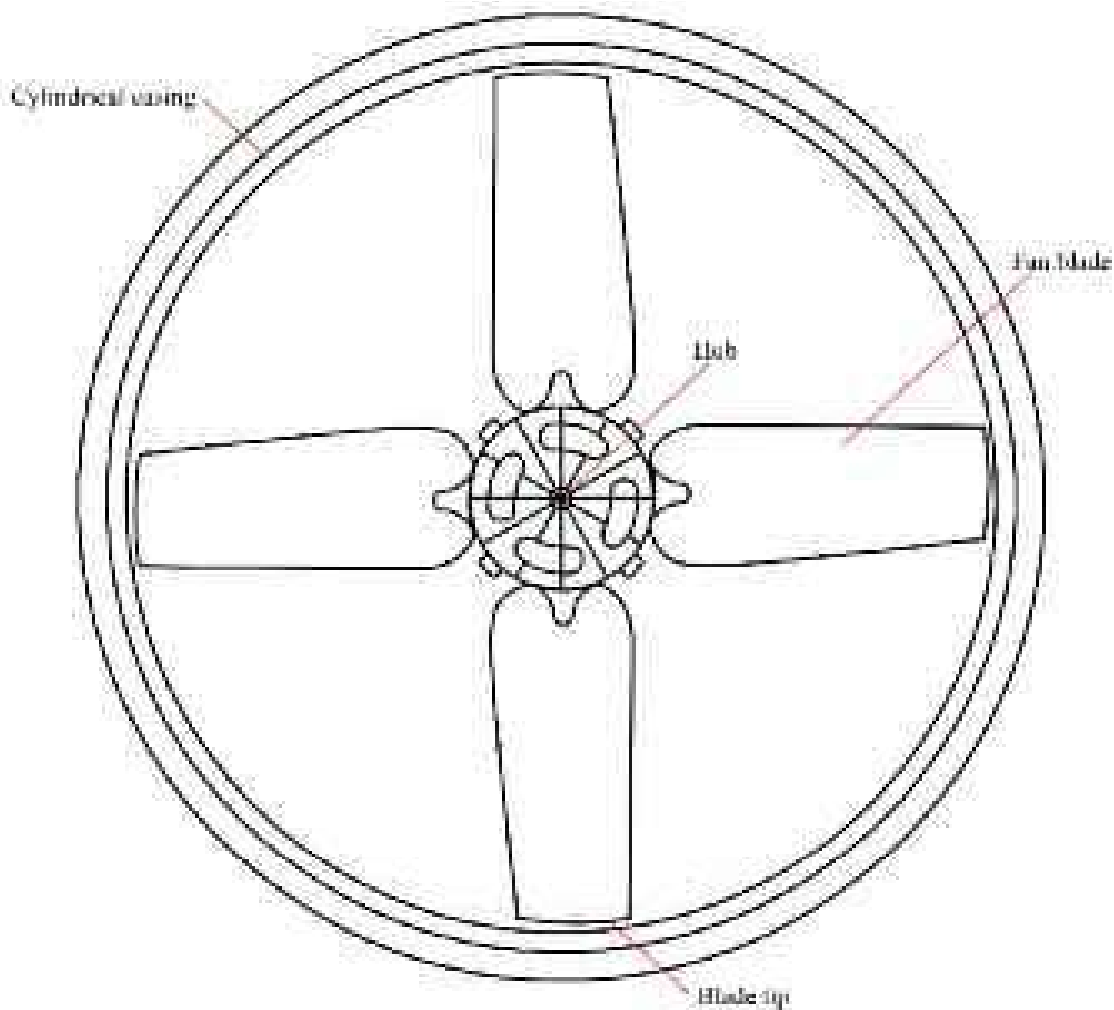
An axial flow fan with four blades mounted on a hub located within a cylindrical casing.
